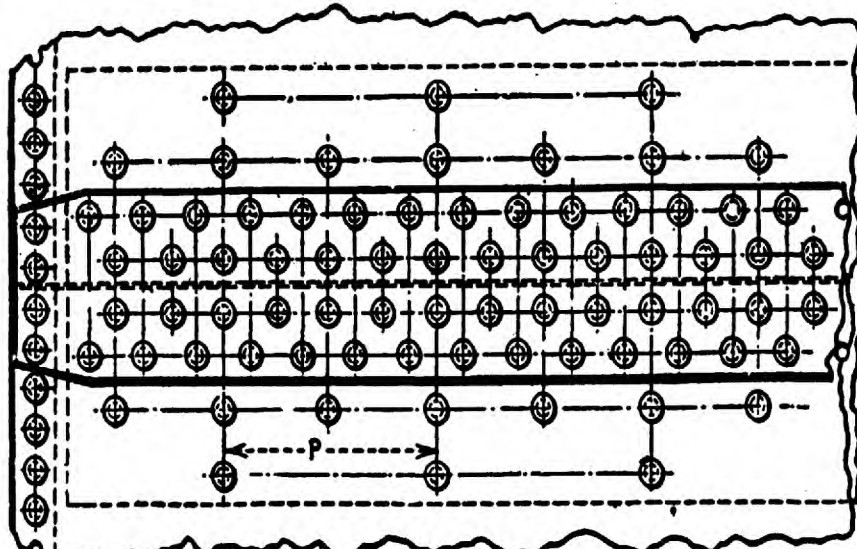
EXAMPLE OF BUTT AND DOUBLE STRAP JOINT, QUADRUPLE-RIVETED
